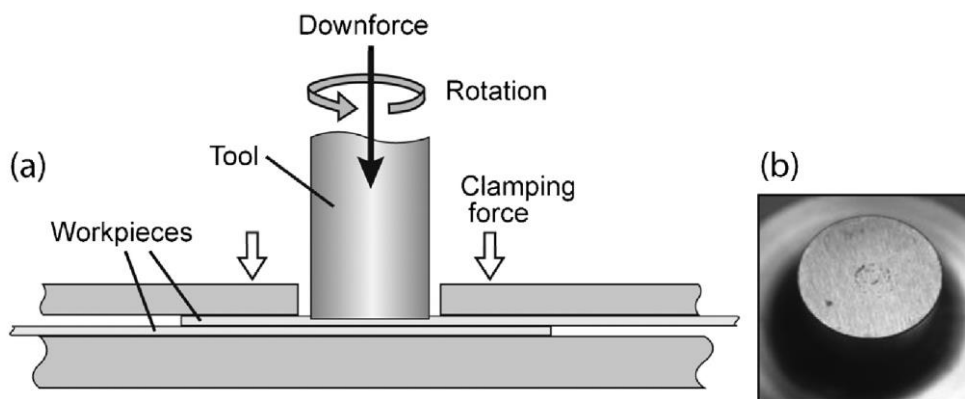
(a) S Scheme of FSSW with a pin-less tool design; (b) FSSW with a flat tool design [55]
